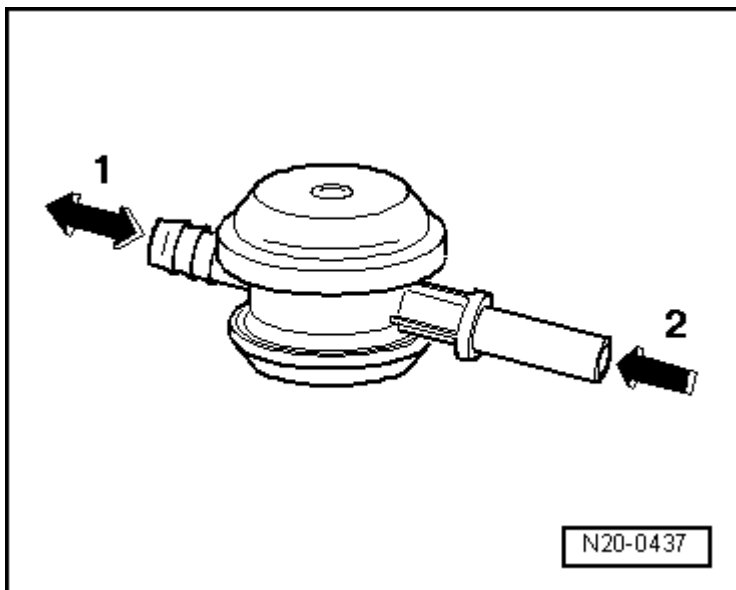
Checking Pressure Retaining Valve On Expansion Tank
